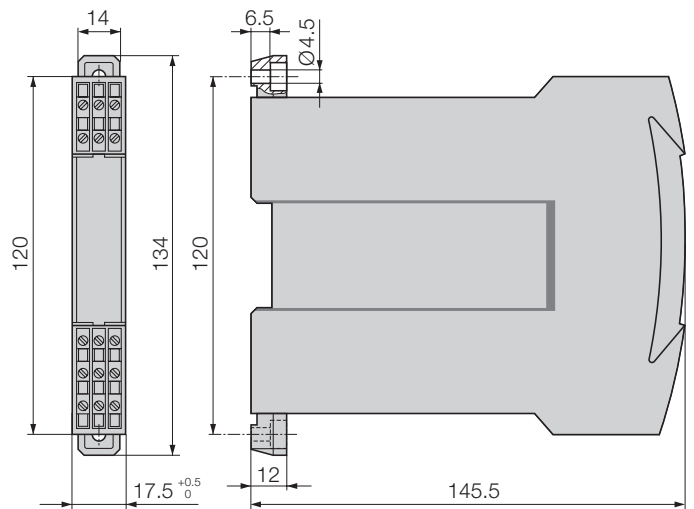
SINEAX SV 814 in housing S17 screw hole mounting brackets pulled out.
